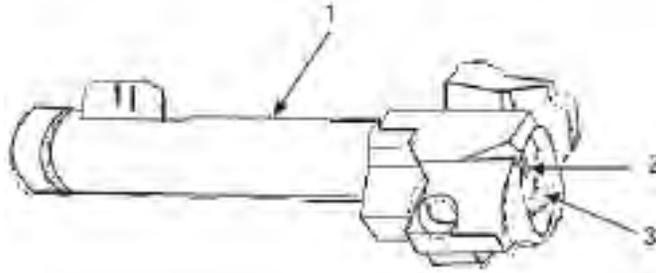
Bolt Assembly, Firing Pin Hde, Bolt Face.
